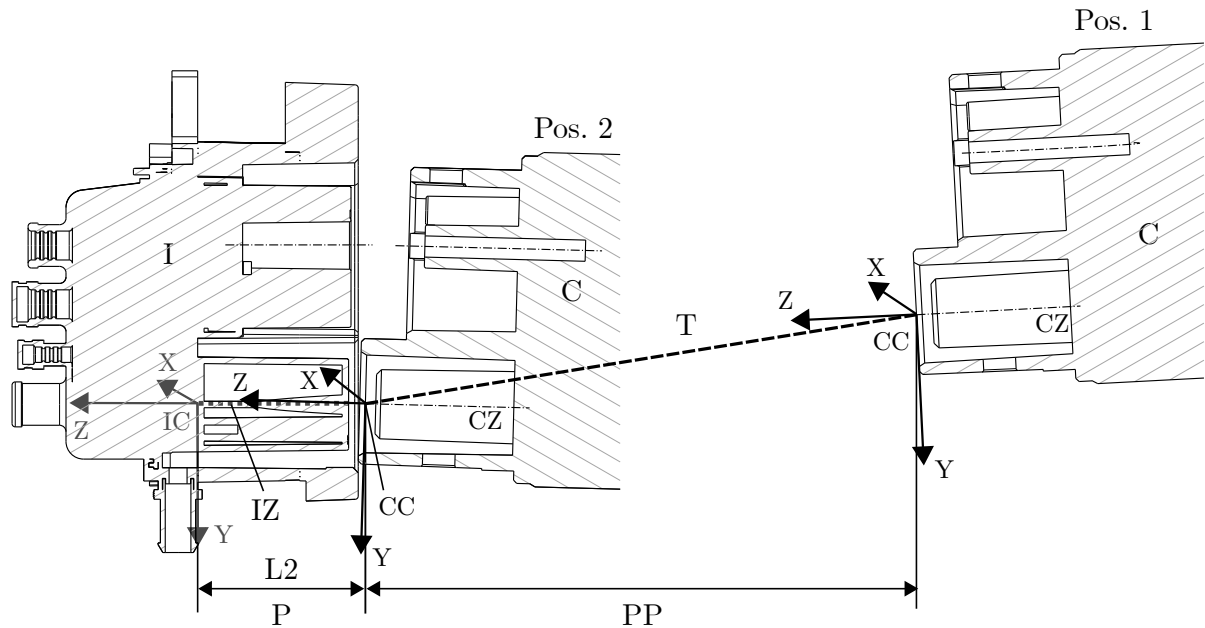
ACCS charging cable plugging process by CAD-model sectional view of CCS charging inlet and -connector.
